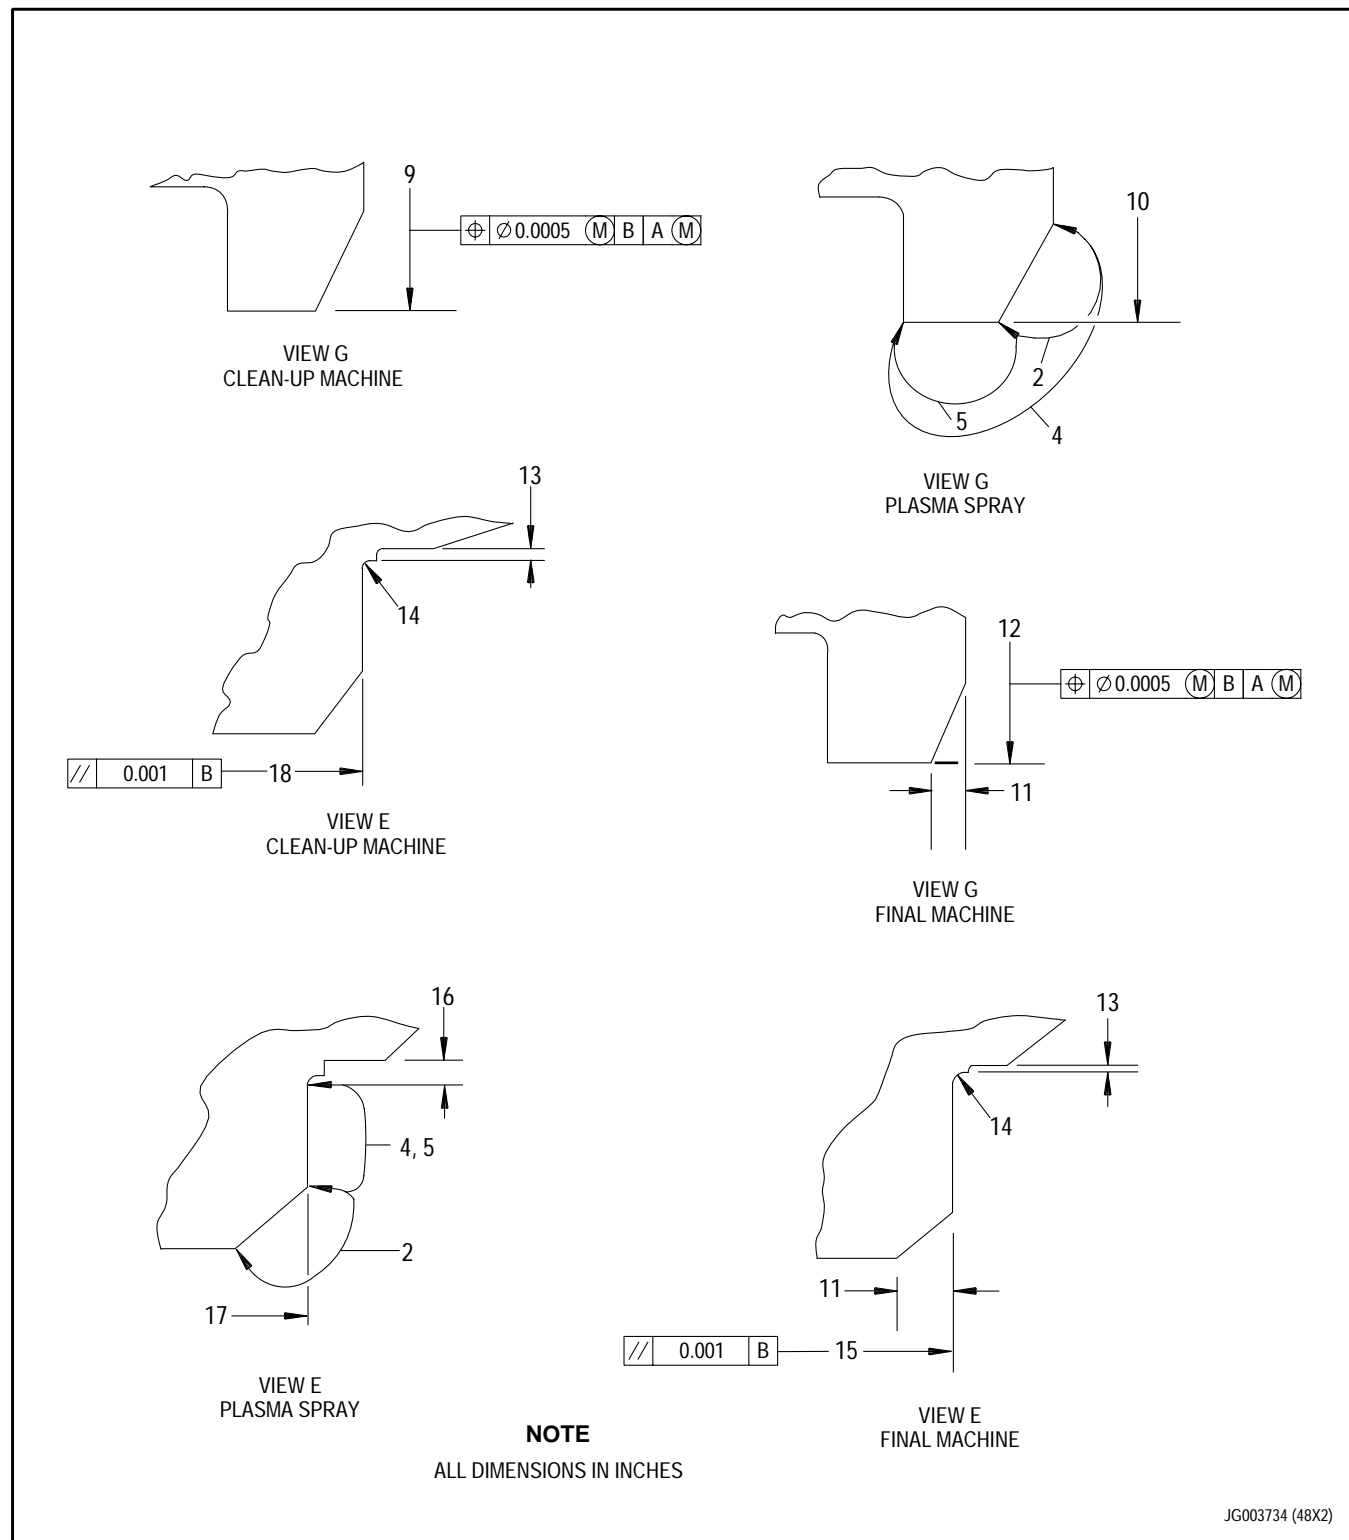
No. 3 Bearing Air Seal - Snap Diameter and Face Repair (Sheet 2 of 2)
